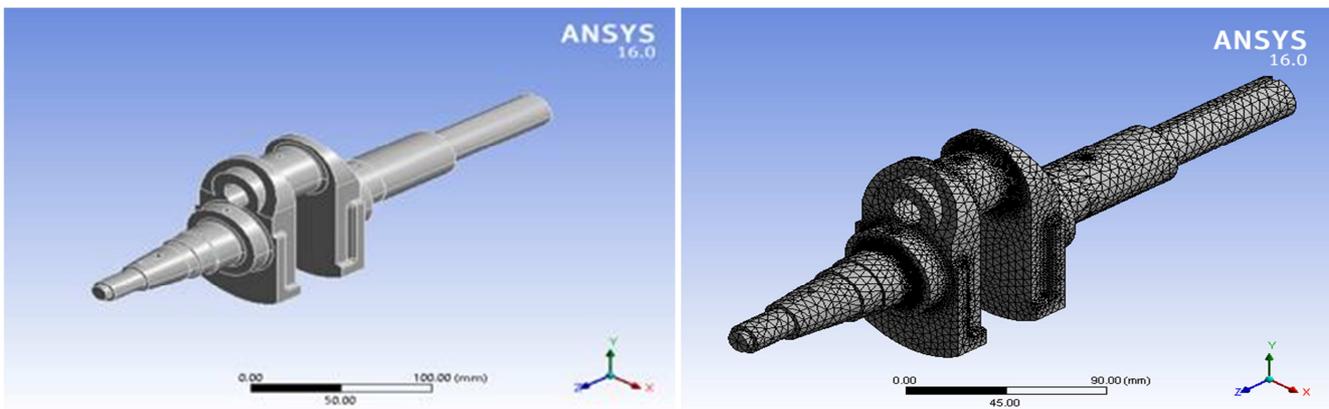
(a) Single cylinder engine crankshaft model with sold work and (b) Single cylinder engine crankshaft meshing with triangular shape of elements.
